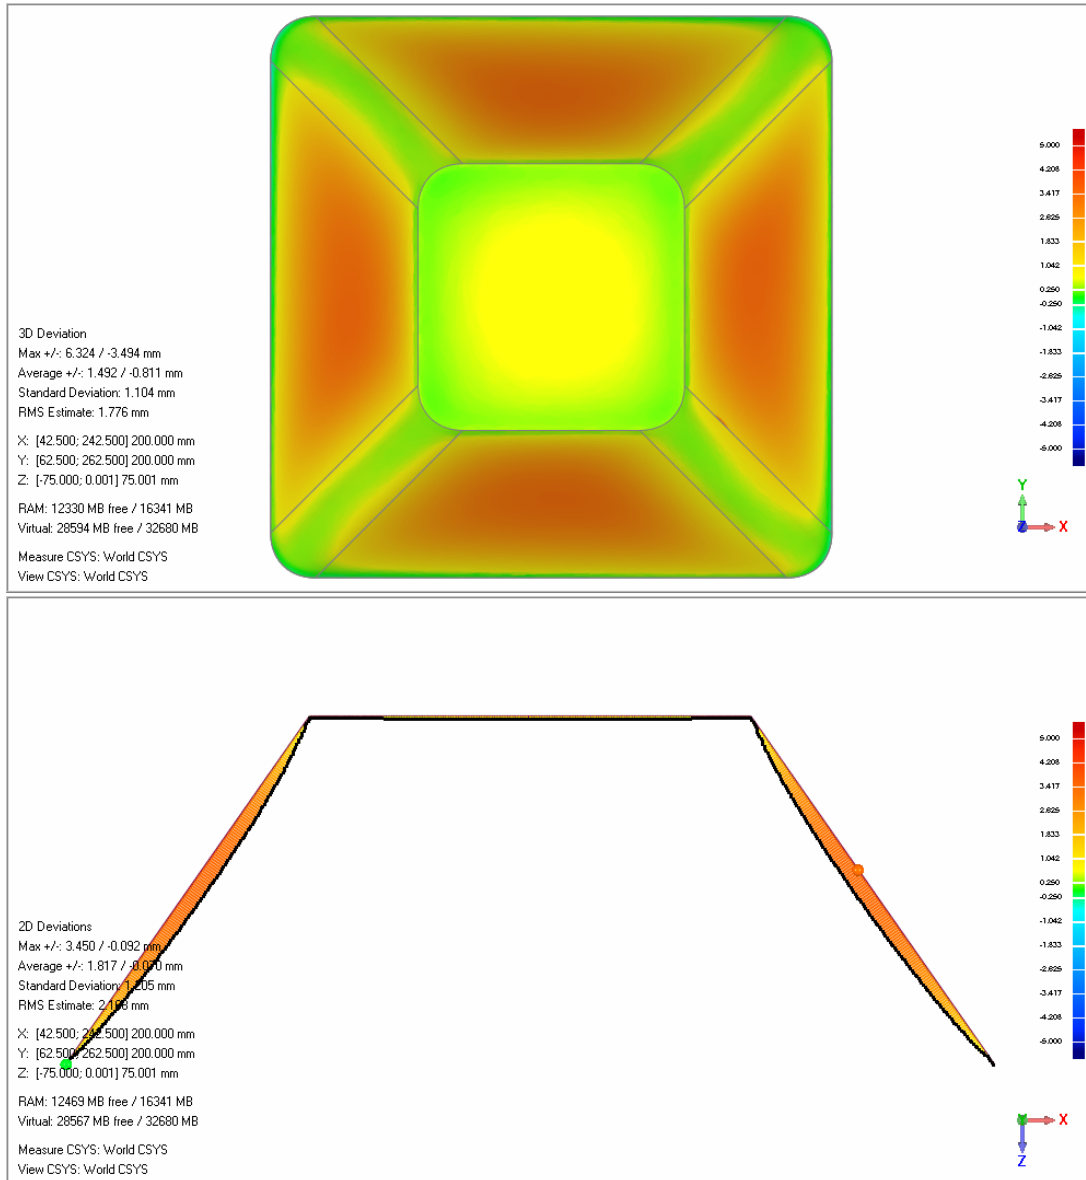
Part T4A geometric accuracy results - top view and cross-section view
